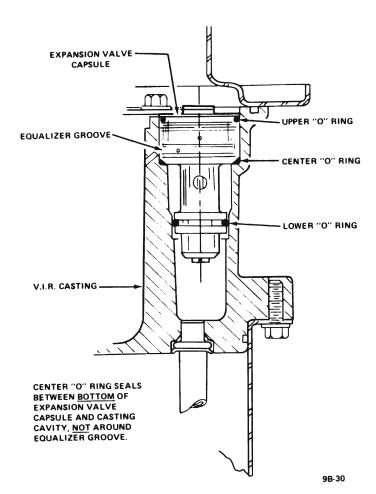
B-34 Location of Upper and Lower "O" Rings on TX Valve
